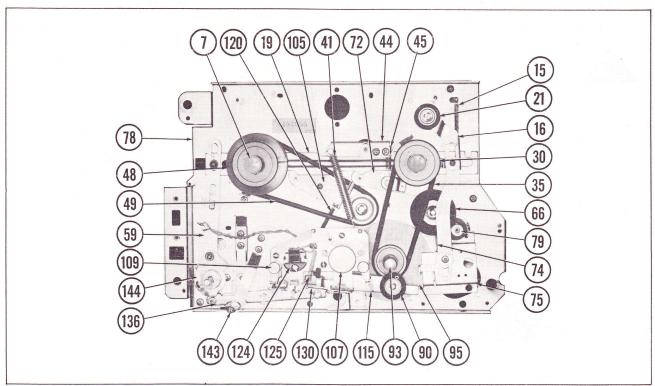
TOP VIEW OF MECHANISM WITH DRESS PLATE REMOVED
